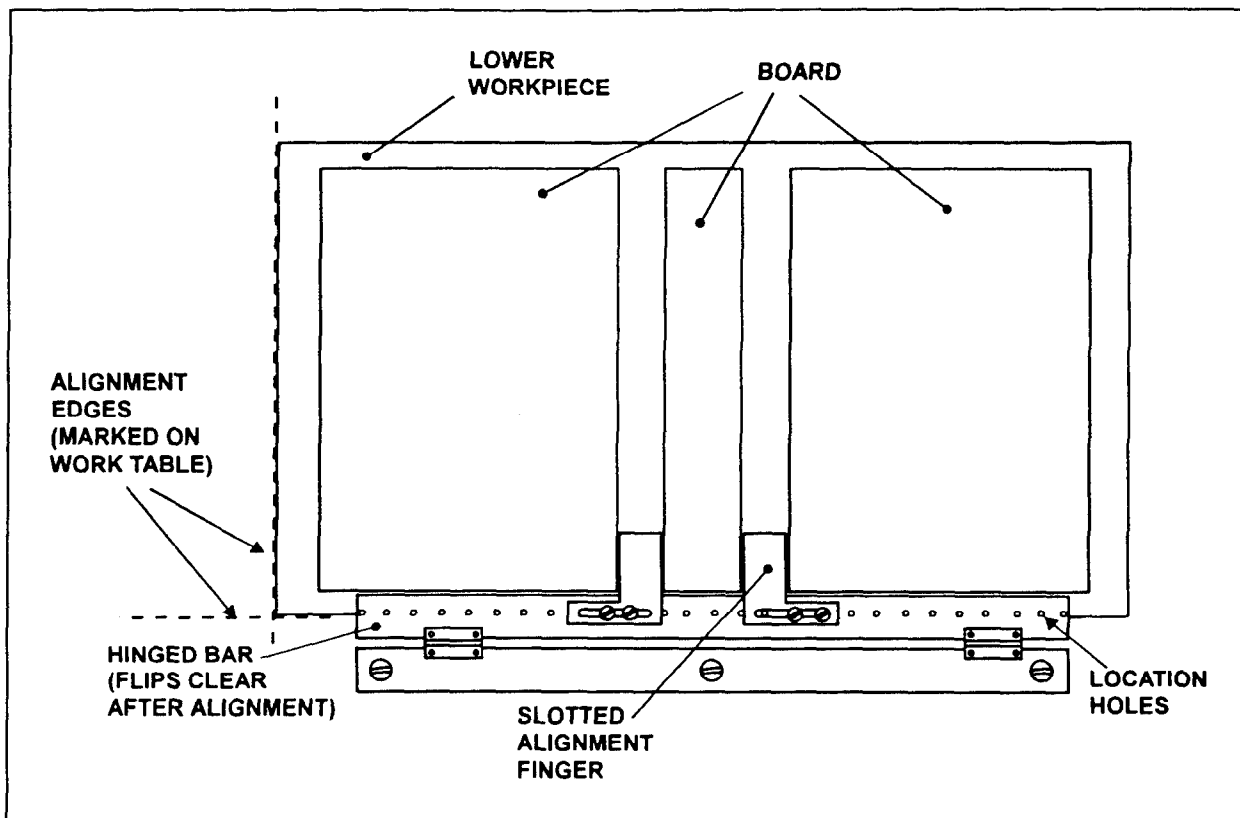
Simple Jig For Aligning Board in a Binder
